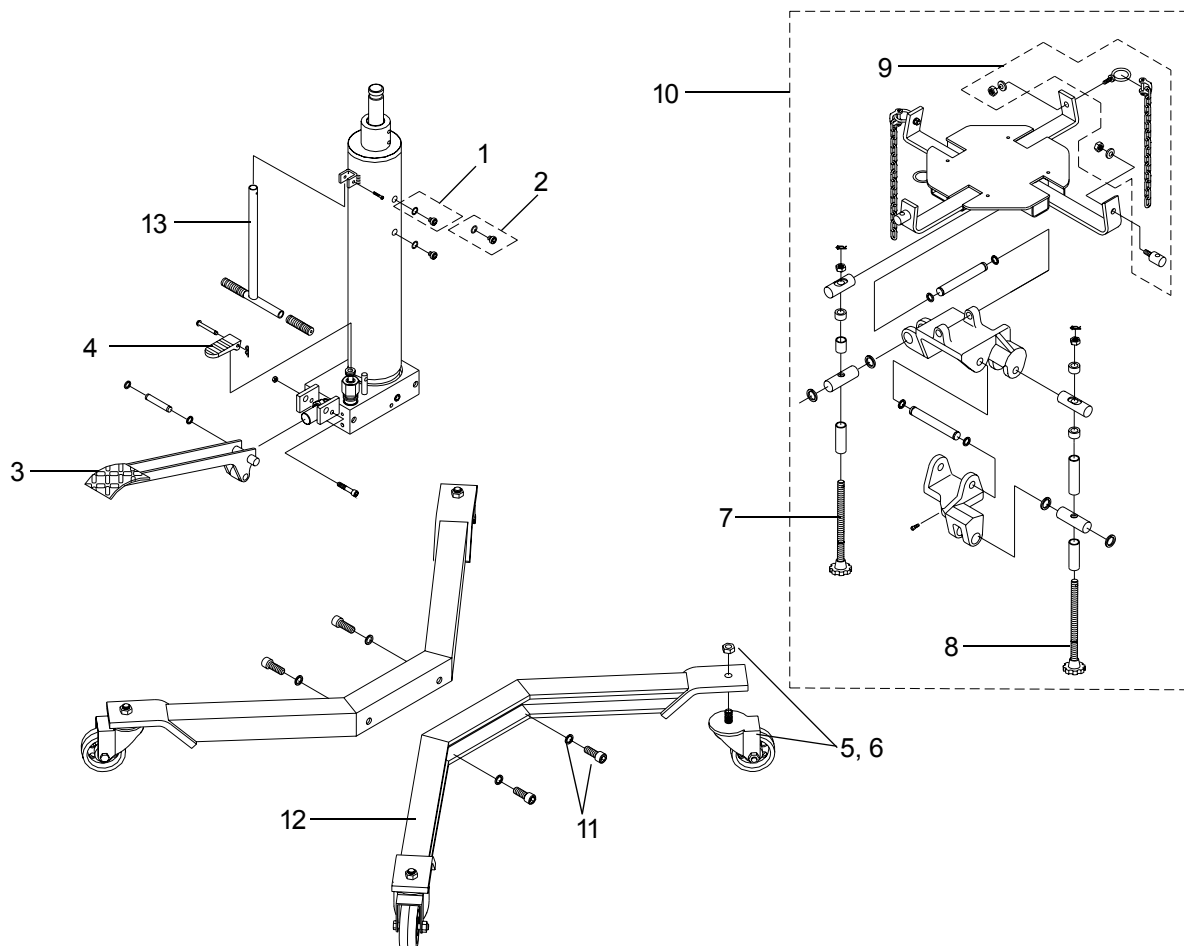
Replacement Parts Illustration for Model KTI-63503
